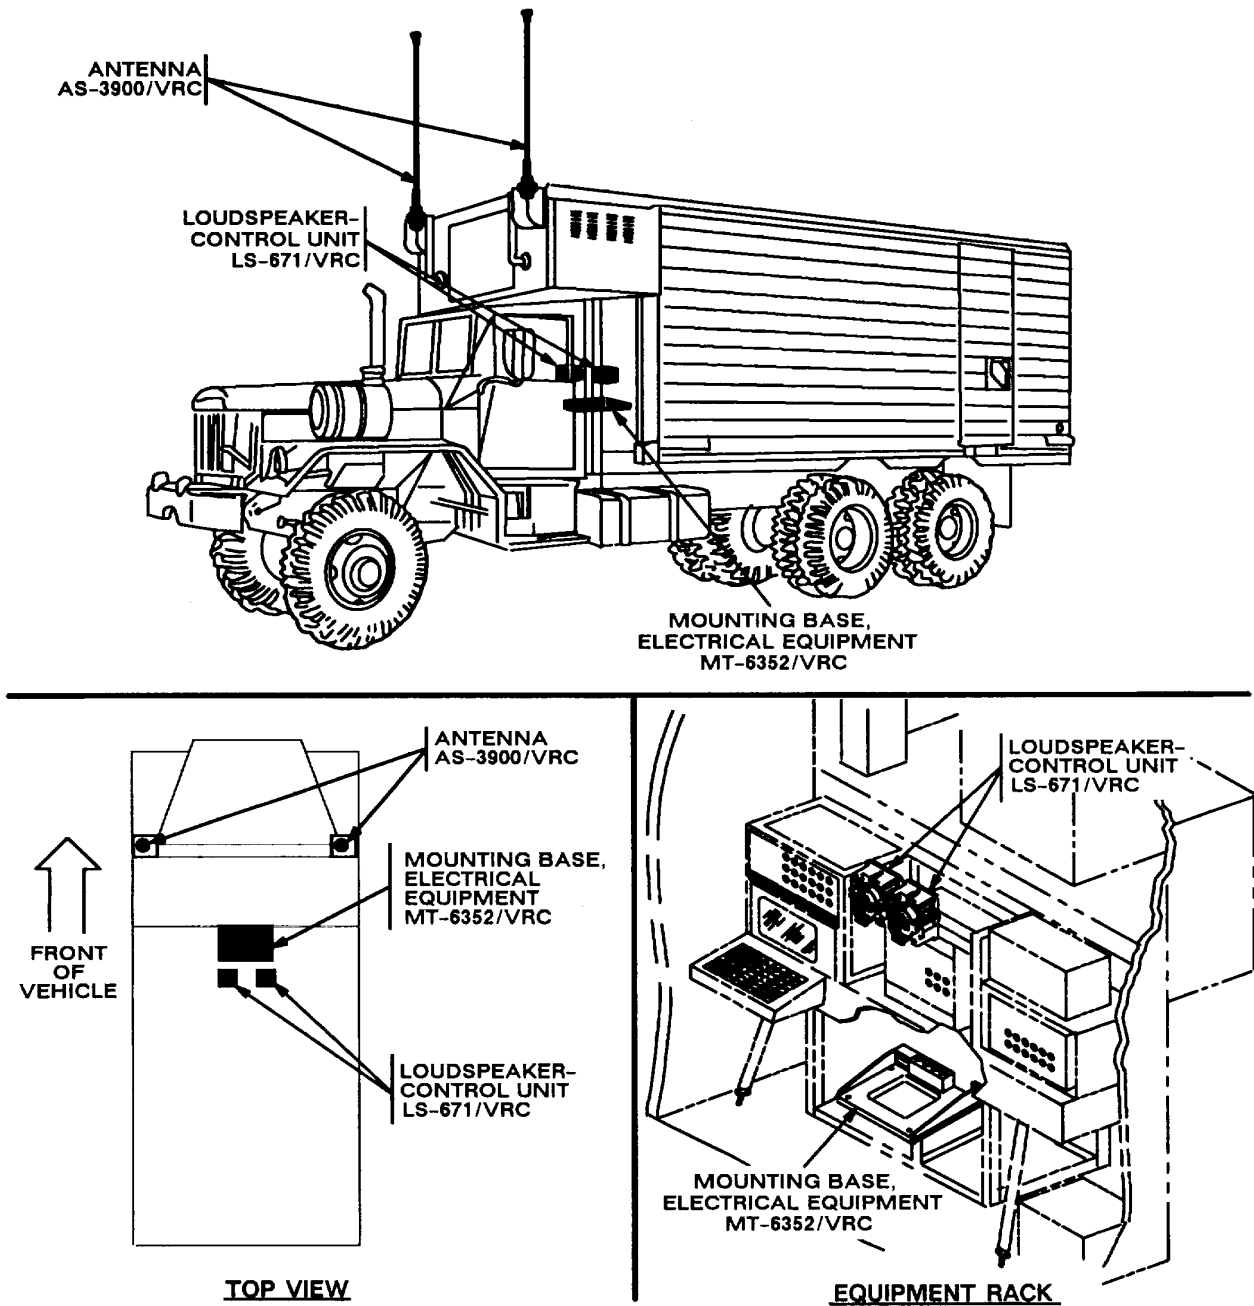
(1). MK and Radio Installation: MK Equipment Locations
